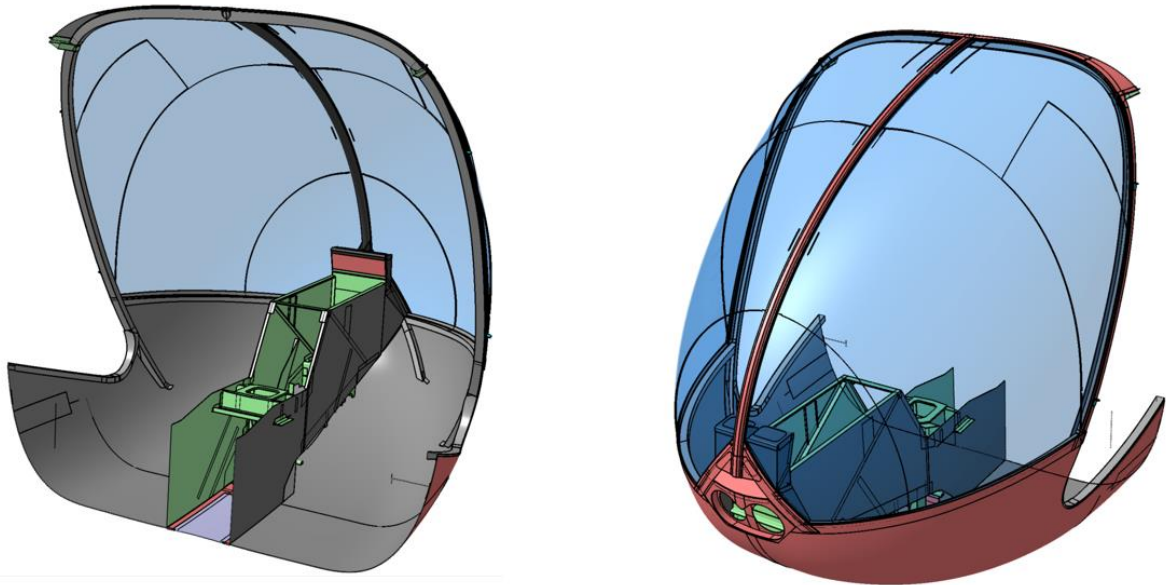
Part 27 Rotorcraft windshield CAD Internal structure.
